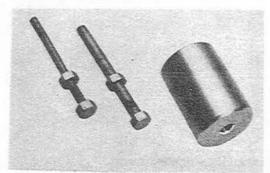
Transfer idle gear shaft remover 0931-9
